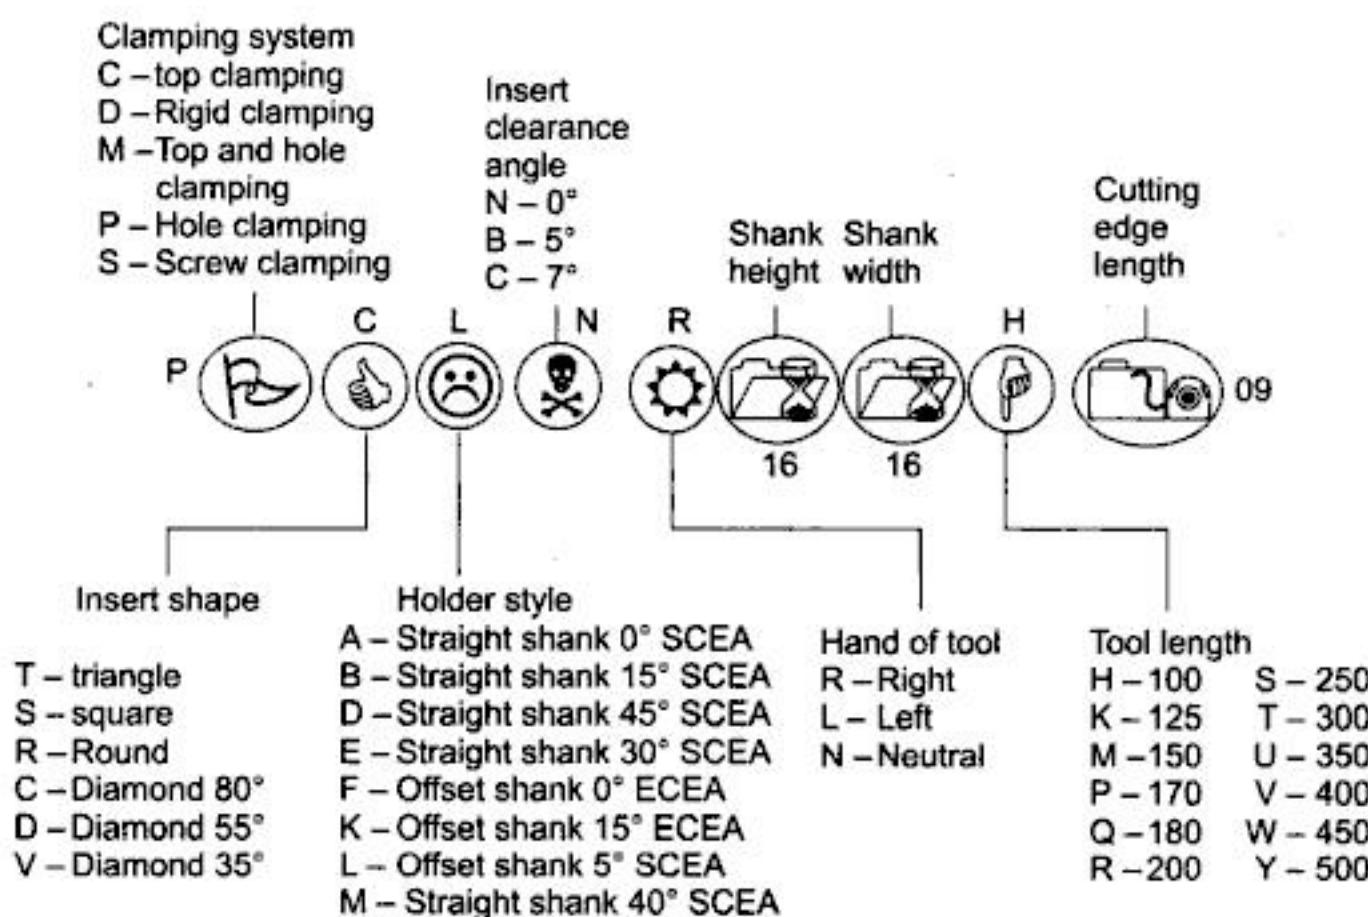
The ISO coding system for tungsten carbide turning tool holders used in external turning (SCEA—side cutting edge angle, ECEA—end cutting edge angle).
